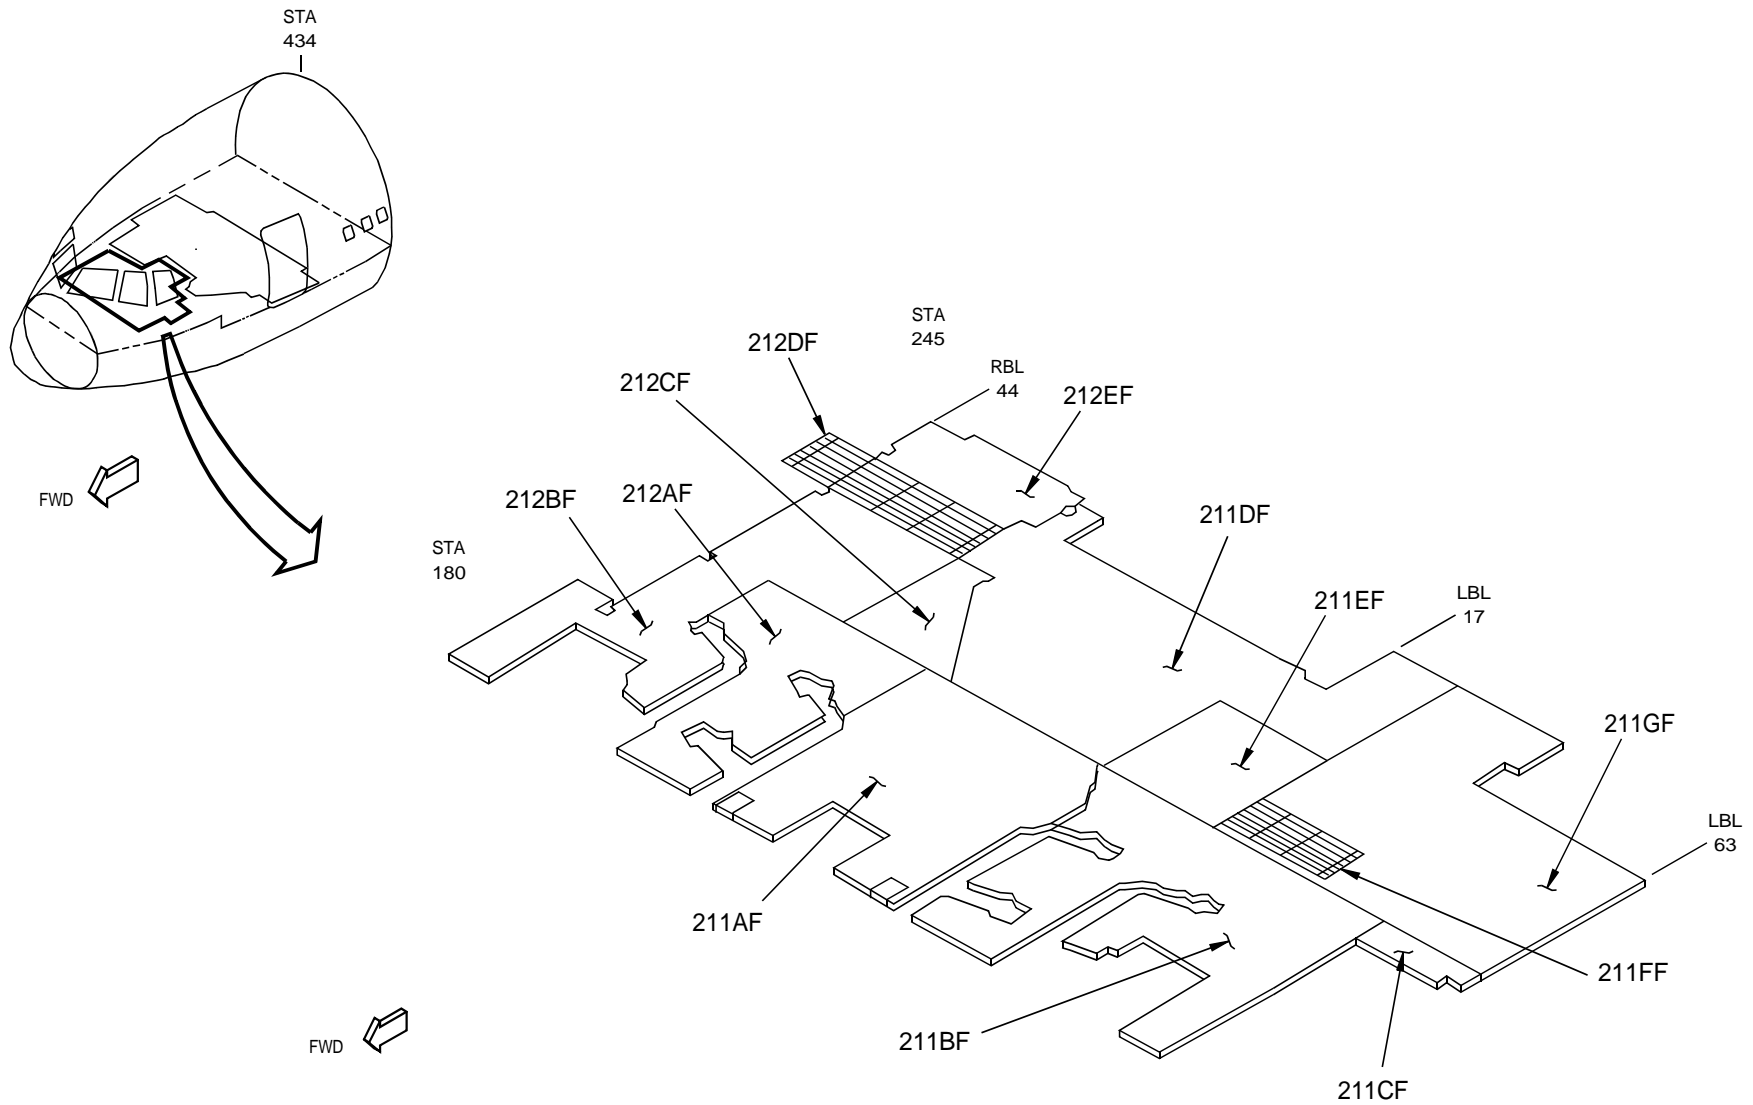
SUB-MAJOR ZONE 211/212 FLIGHT DECK FLOOR PANELS
